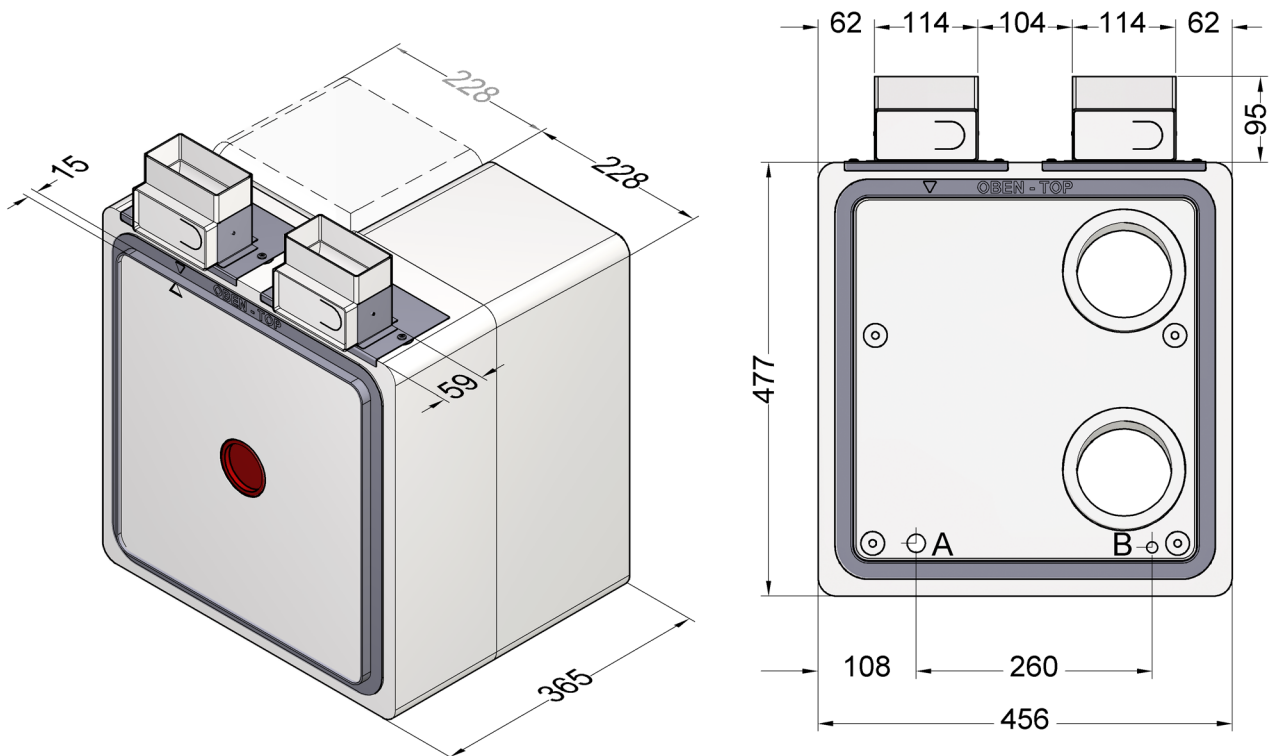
Dimensions of the installation kit with filler piece in millimetres
